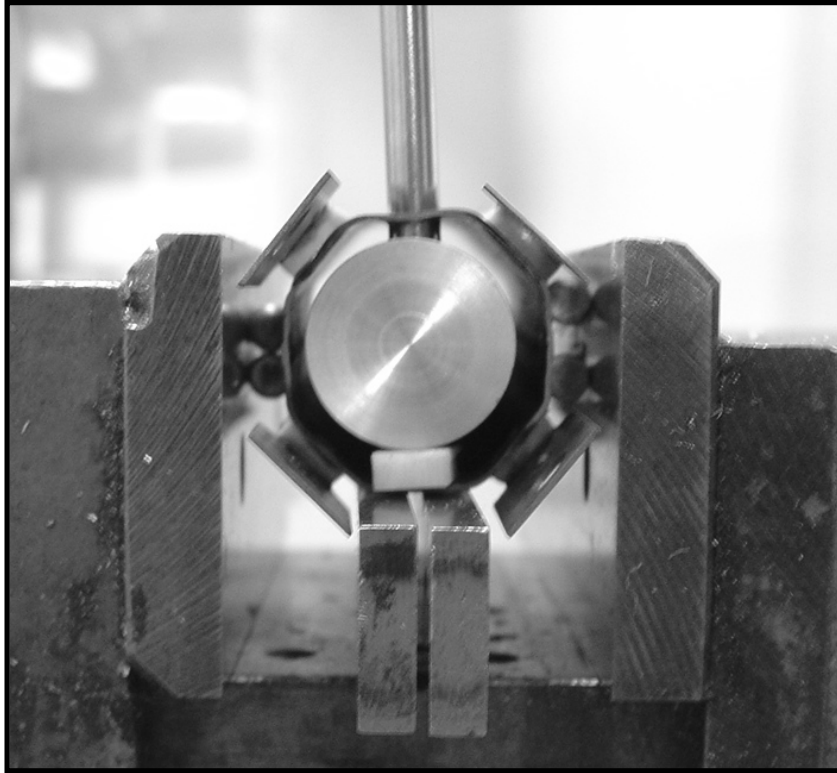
Alignment of System Shaft for Roll Pin Insertion
